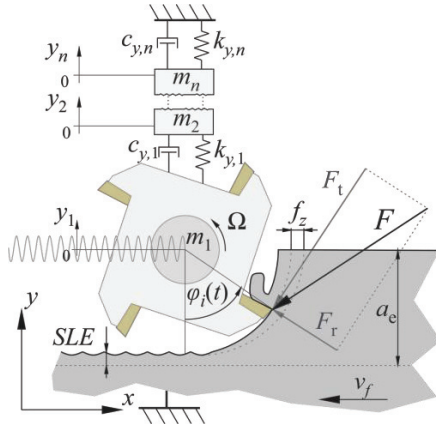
Mechanical model of the milling process and representation of the Surface Location Error (SLE)
